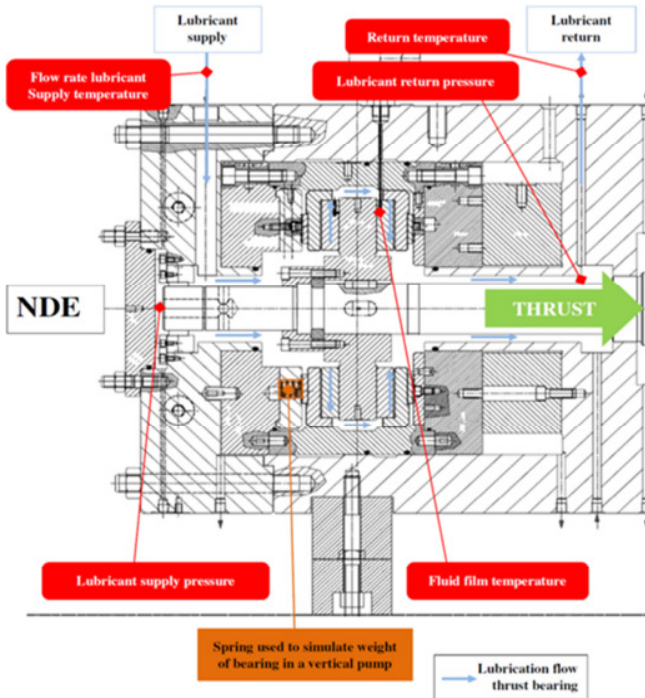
Cross sectional view of the thrust bearing test rig, indicating the position of the various sensors.
